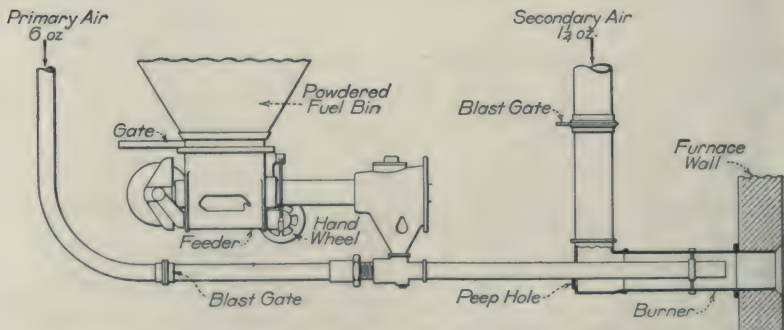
Quigley Burner Arrangement for Powdered Coal.
